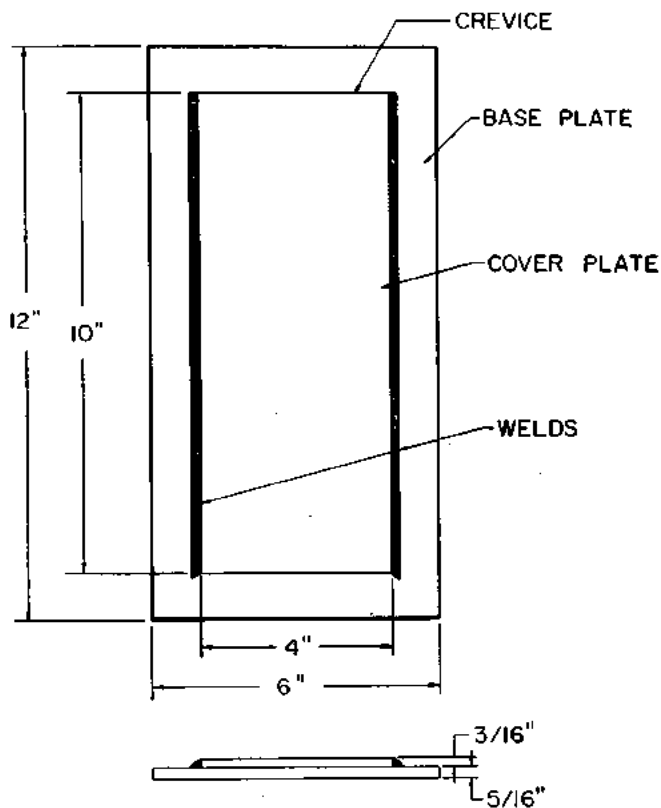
Arrangement of plate components in weld-crevice assemblies.
